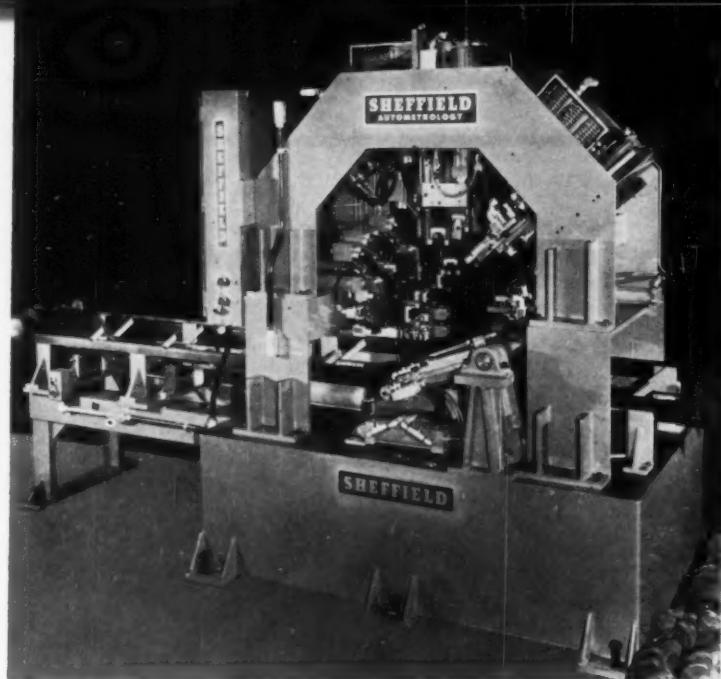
This "preprocess" gage checks the minimum-maximum metal conditions of an automotive crankshaft prior to machining to prevent tool damage from excessive stock and to eliminate cost of machining oversize forgings. Not only are the machine tools provided maximum protection, but costs are reduced by the elimination of costly machining and grinding on forgings that will not meet minimum metal requirements.
